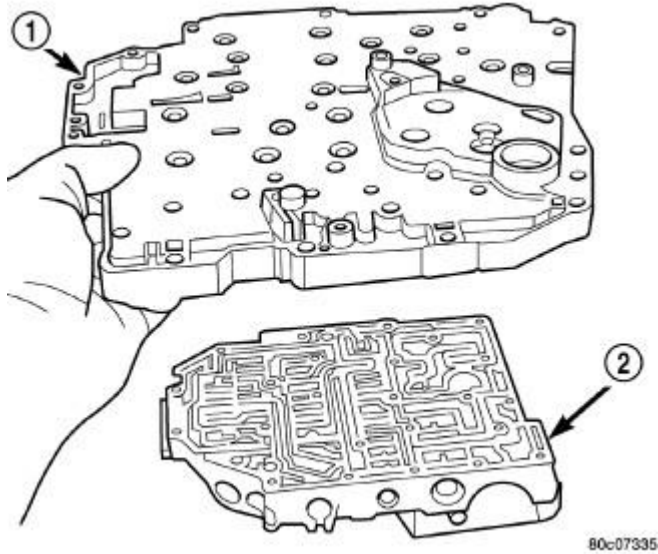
Remove/Install Transfer Plate-at-Valve Body
